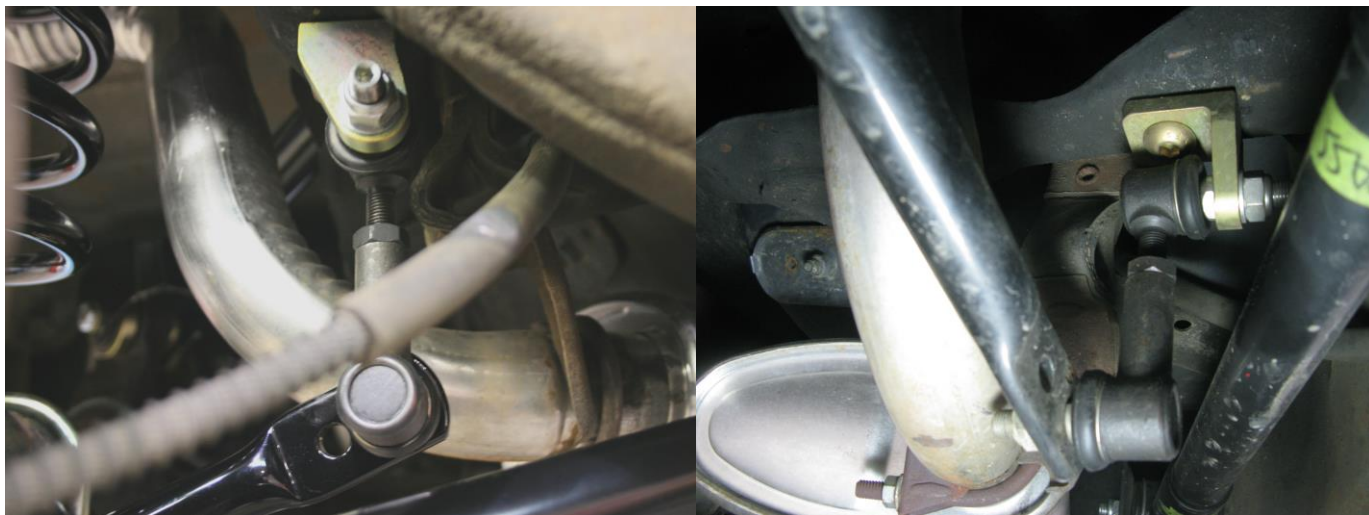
Upper Mounting Bracket Orientation (Passenger Side Shown)
